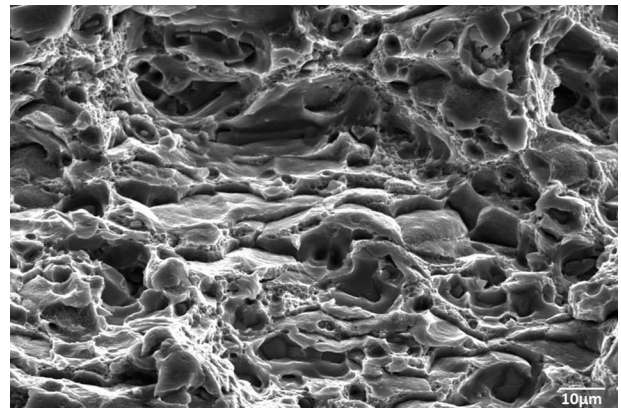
High magnified image of the fracture surface shown in Fig. 17
